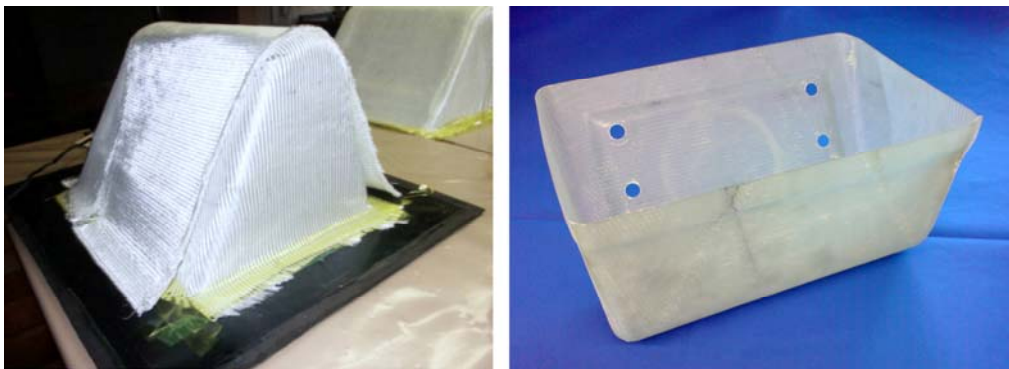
Bucket composite structure, left: perform in the RTM moulding tool, right: infiltrated and machined structure [5]
